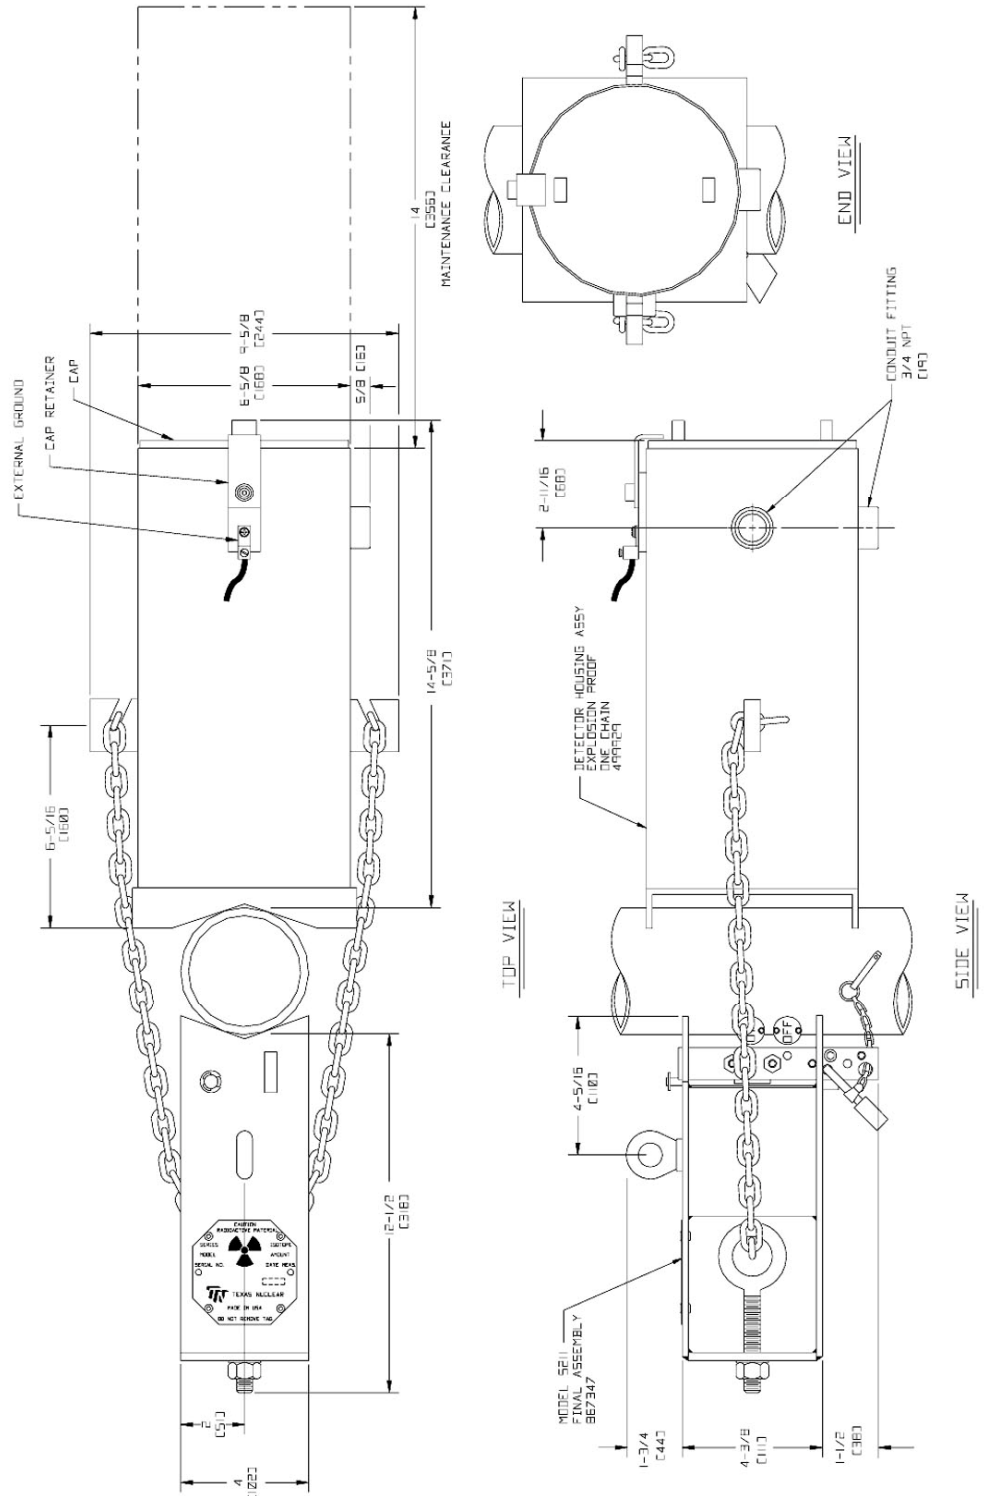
867465: Installation drawing, source/detector assembly single chain mount, explosion proof housing (sheet 1 of 1)
